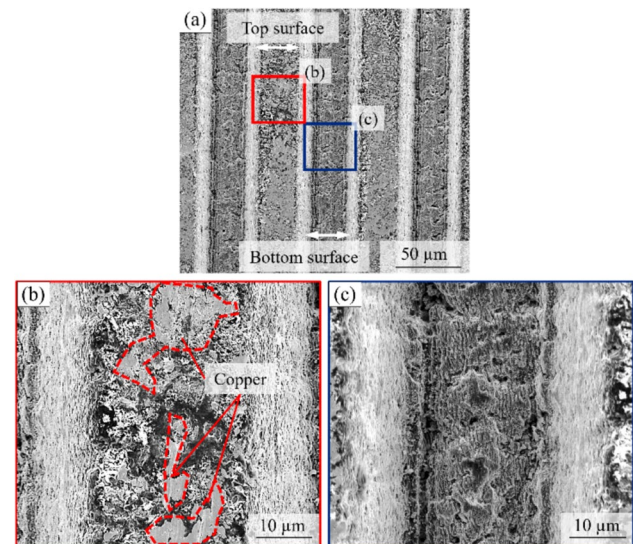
SEM images of the tool surface after burnishing: a overall view; b enlarged view of the top surface of groove; c enlarged view of the bottom surface of the groove
